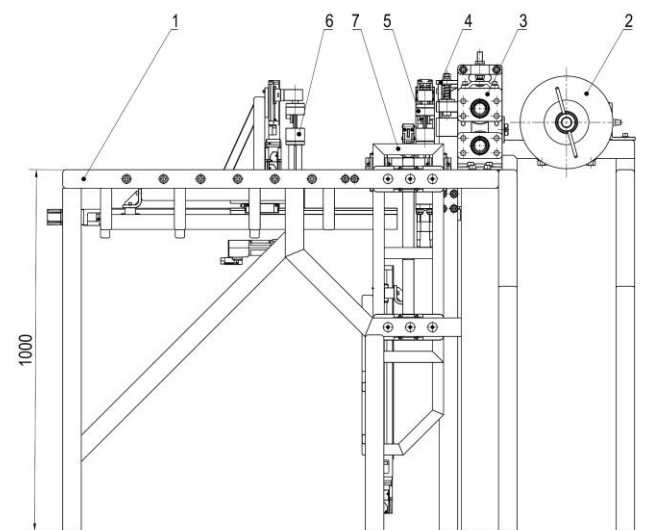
System for automatic welding of belts: 1 – main frame, 2 – unwind unit, 3 – roll feeder, 4 – shear cutter, 5 – fixed gripper, 6 – sliding gripper, 7 – welding assembly
